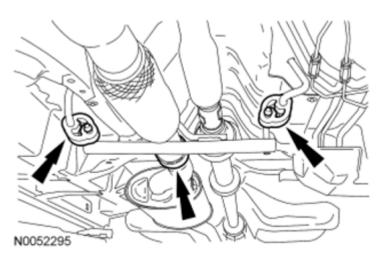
Locating Exhaust Flexible Pipe Clamp Courtesy of FORD MOTOR CO.
